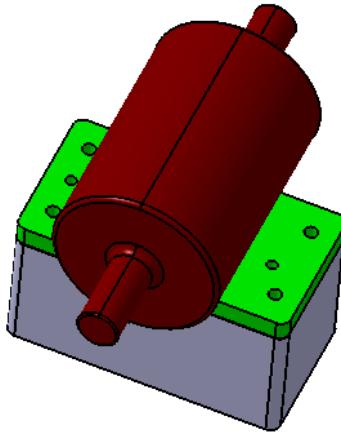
CAD Torque Sensor Mounting Assembly [21]
